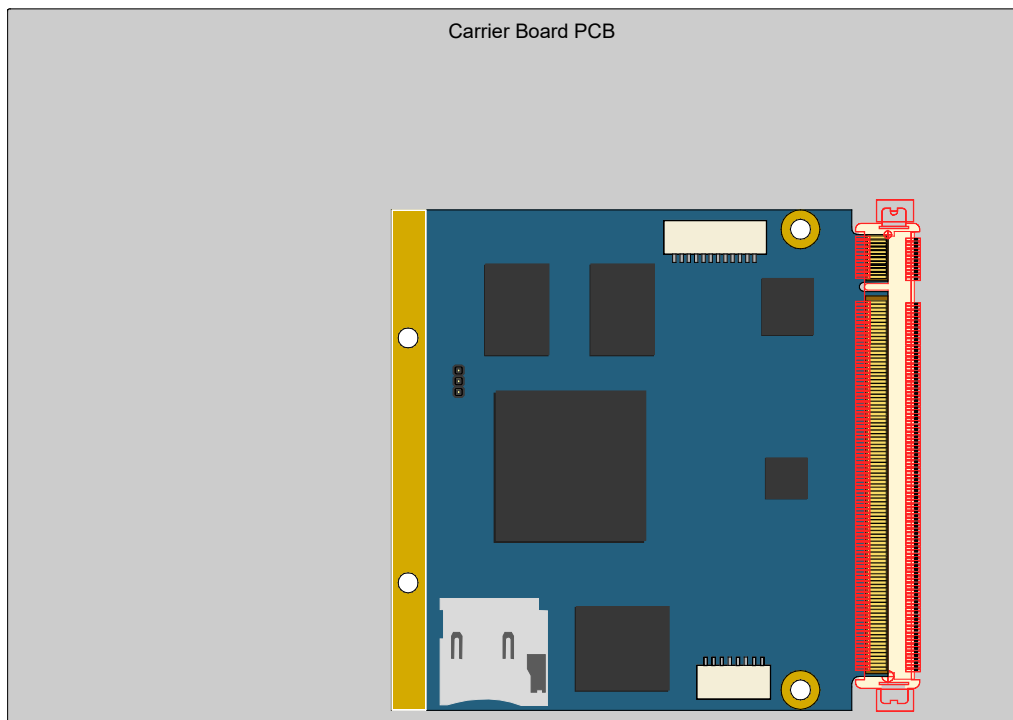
PCB footprint for Qseven module inserted in the MXM connector on the carrier board
